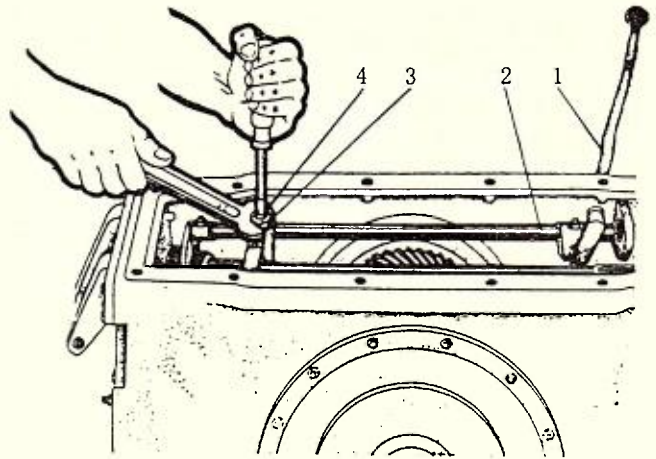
Adjusting the locking spring tension of PTO shift fork shaft
